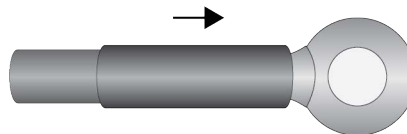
Sliding the Heat-Shrink Tube Over the Ring Terminal Lug
